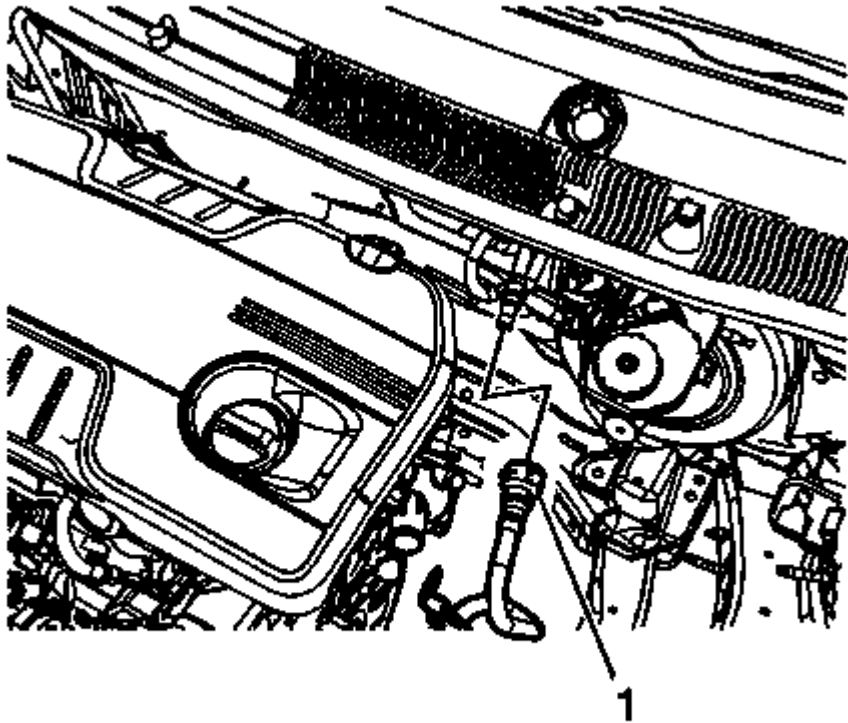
Power Brake Booster Vacuum Pipe Quick Connect
